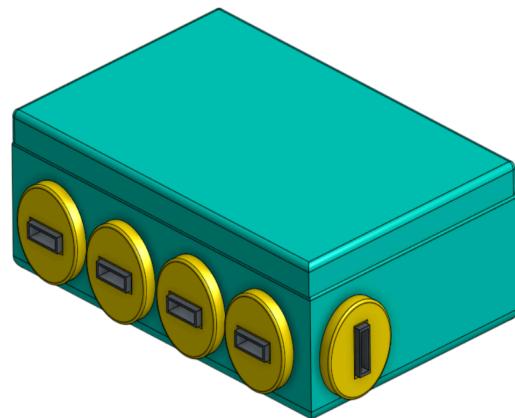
3D Enclosure Design of the Actuator Module
